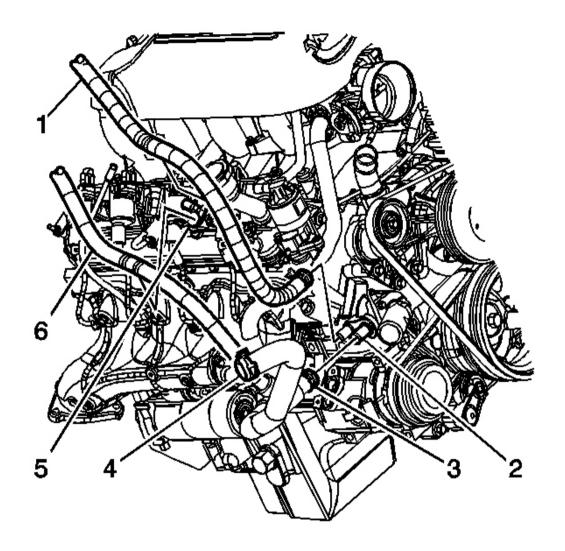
Heater Inlet Hose & Engine Courtesy of GENERAL MOTORS CORP.
